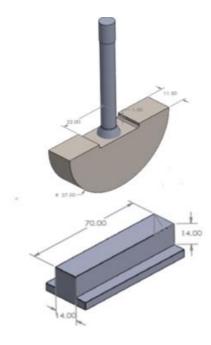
Dimensions for cylindrical and plane type specimens used for tests
